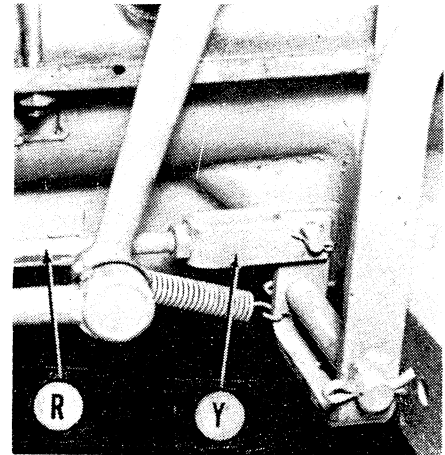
Pony clutch pedal adjustment. Turn yoke (Y) on rod (R) until pedal has one inch free travel.
